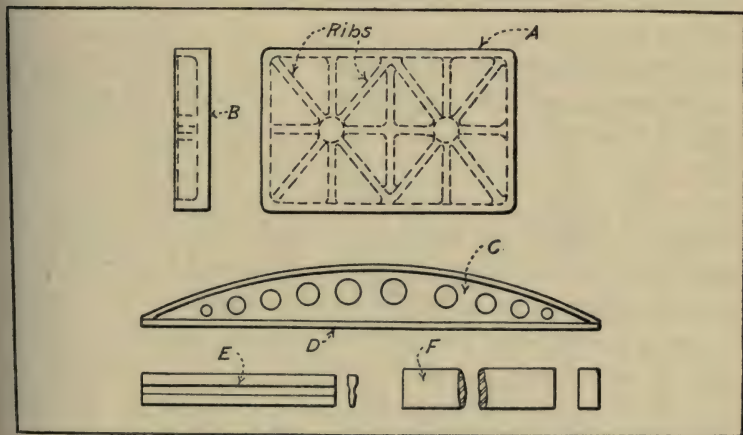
SURFACE PLATES AND STRAIGHT EDGES
